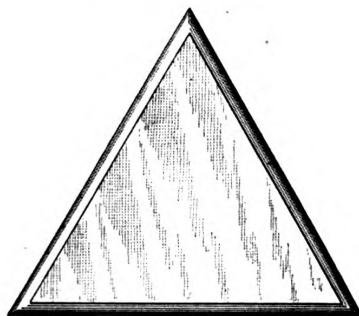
Plan of Top of Stool.—Scale, 1 1/4 Inches to the Foot.
